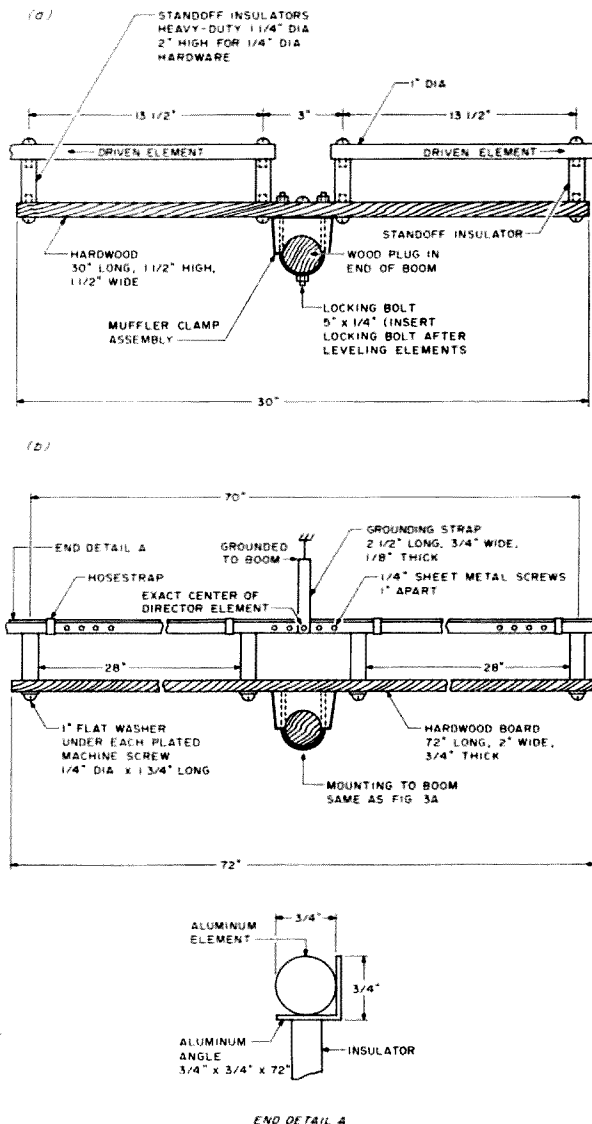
(a) Driven element mounting details. (b) Director driven element details. Detail A shows element-to-angle construction technique.
